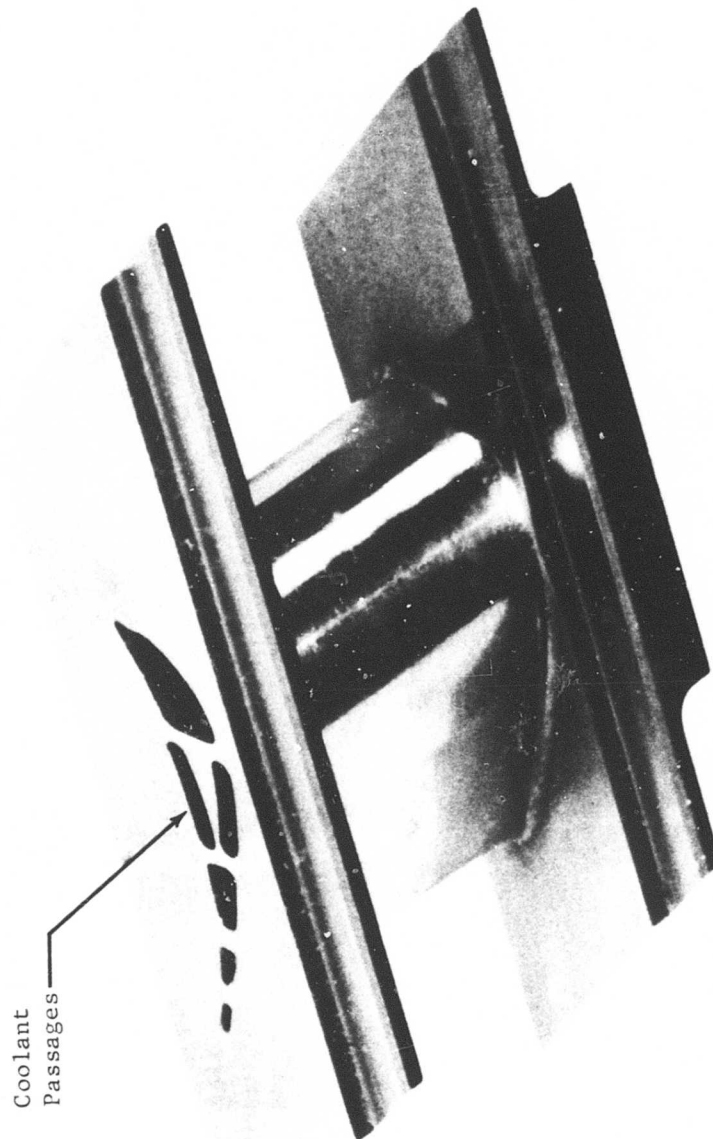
Liquid-Metal-Cooled Vane Showing Electrical Discharge Machined Coolant Passages.
